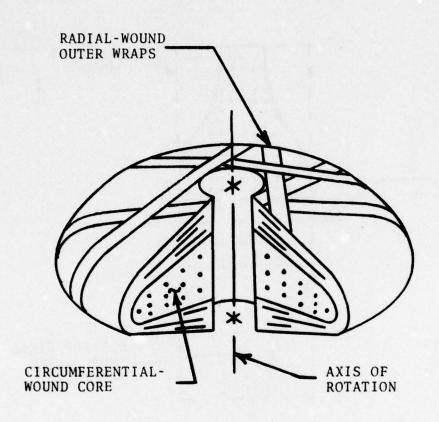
RADIAL-WRAPPED CORE FLYWHEEL
